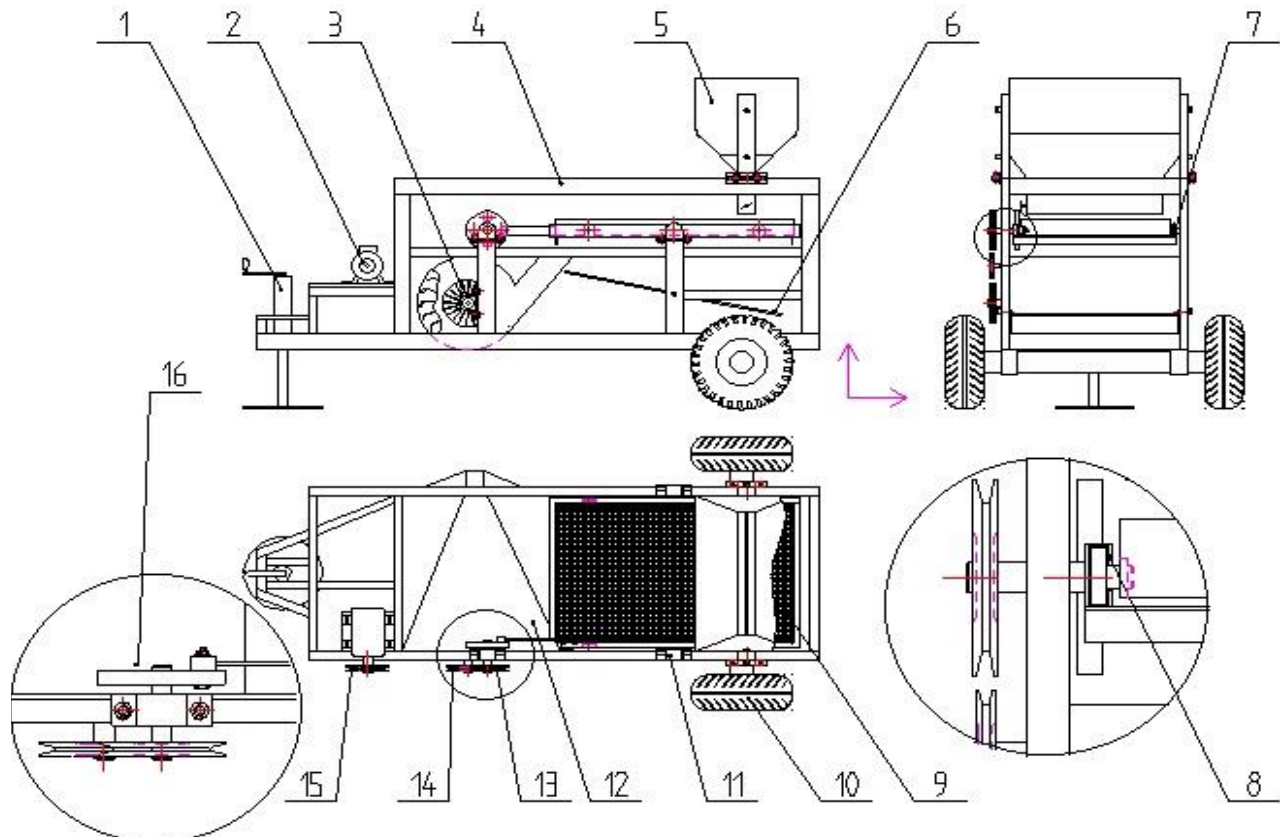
1- hydraulic jack, 2- electric motor, 3- high capacity fan, 4- frame, 5- seed box, 6- trashes pan, 7- shaker, 8- screen, 9- bearing 10- driving wheel, 11- bearing, 12- clean kernels pan, 13- cam pulley, 14- fan pulley, 15- driving pulley, 16- cam system.
